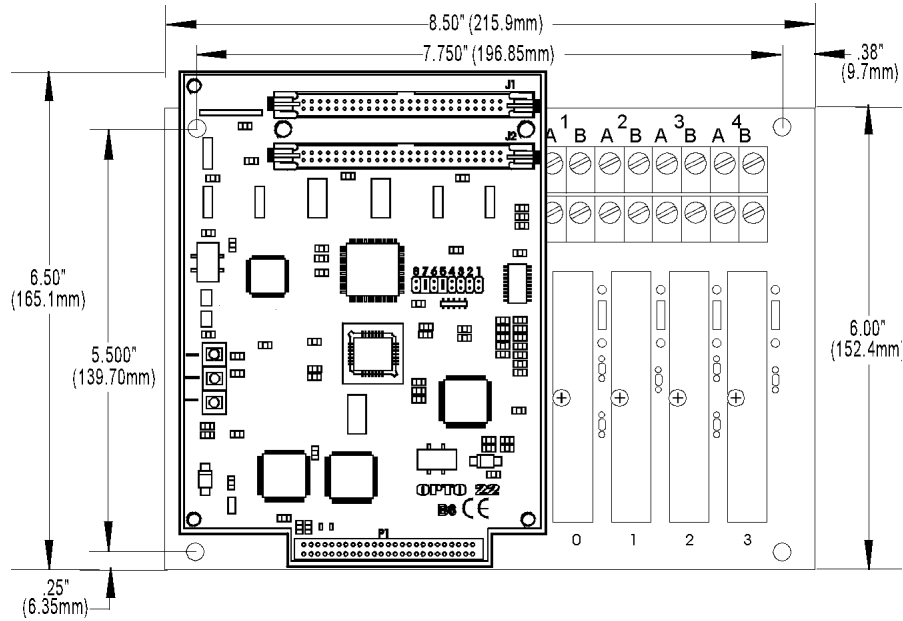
Mounting Dimensions of the PB4AH with a B6 Installed
